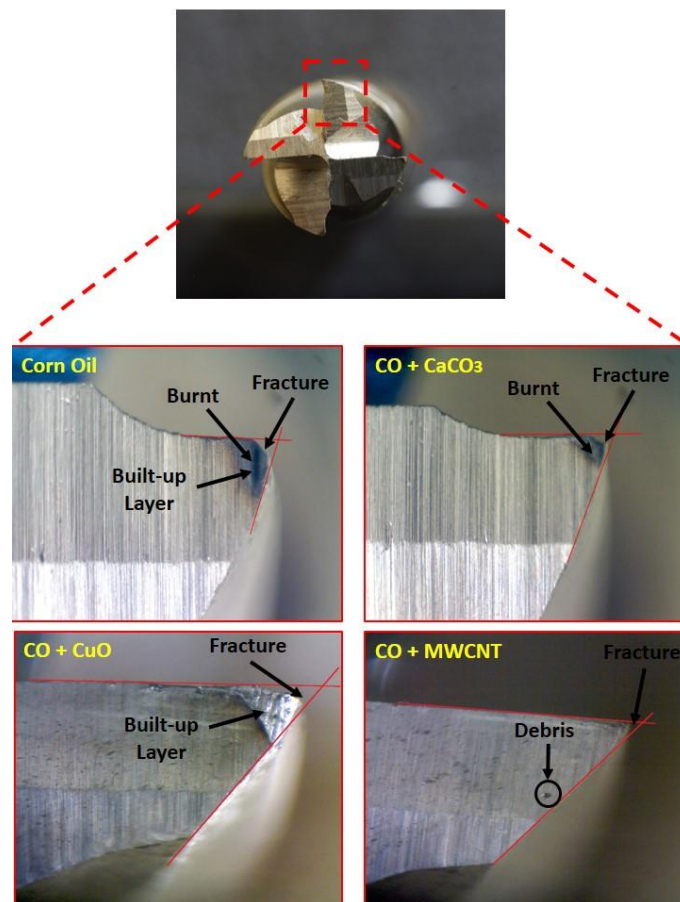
Macro photo of tool wear on one of the endmill flutes
